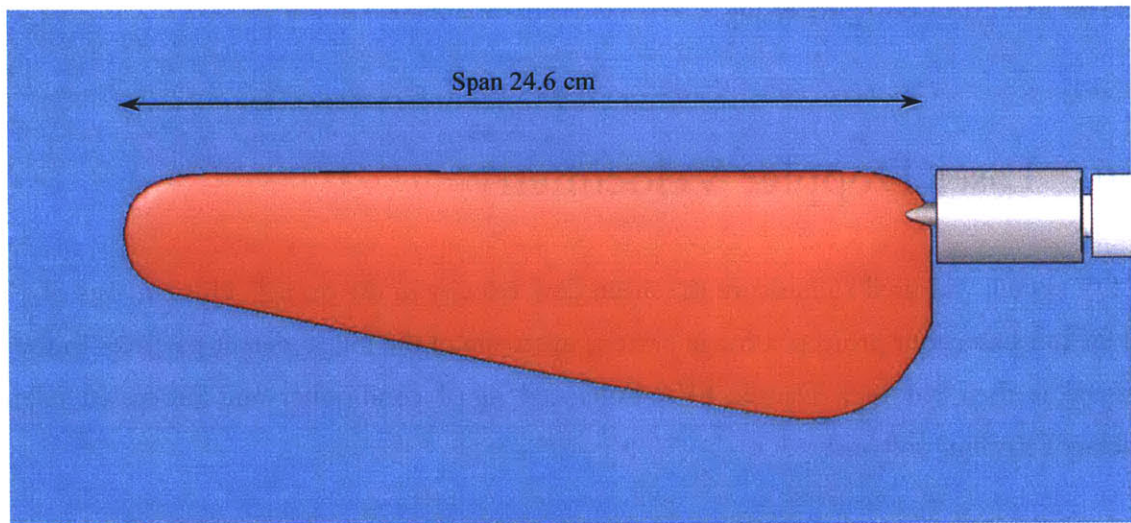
Solidworks drawing of the NACA 0012 linearly tapered foil
